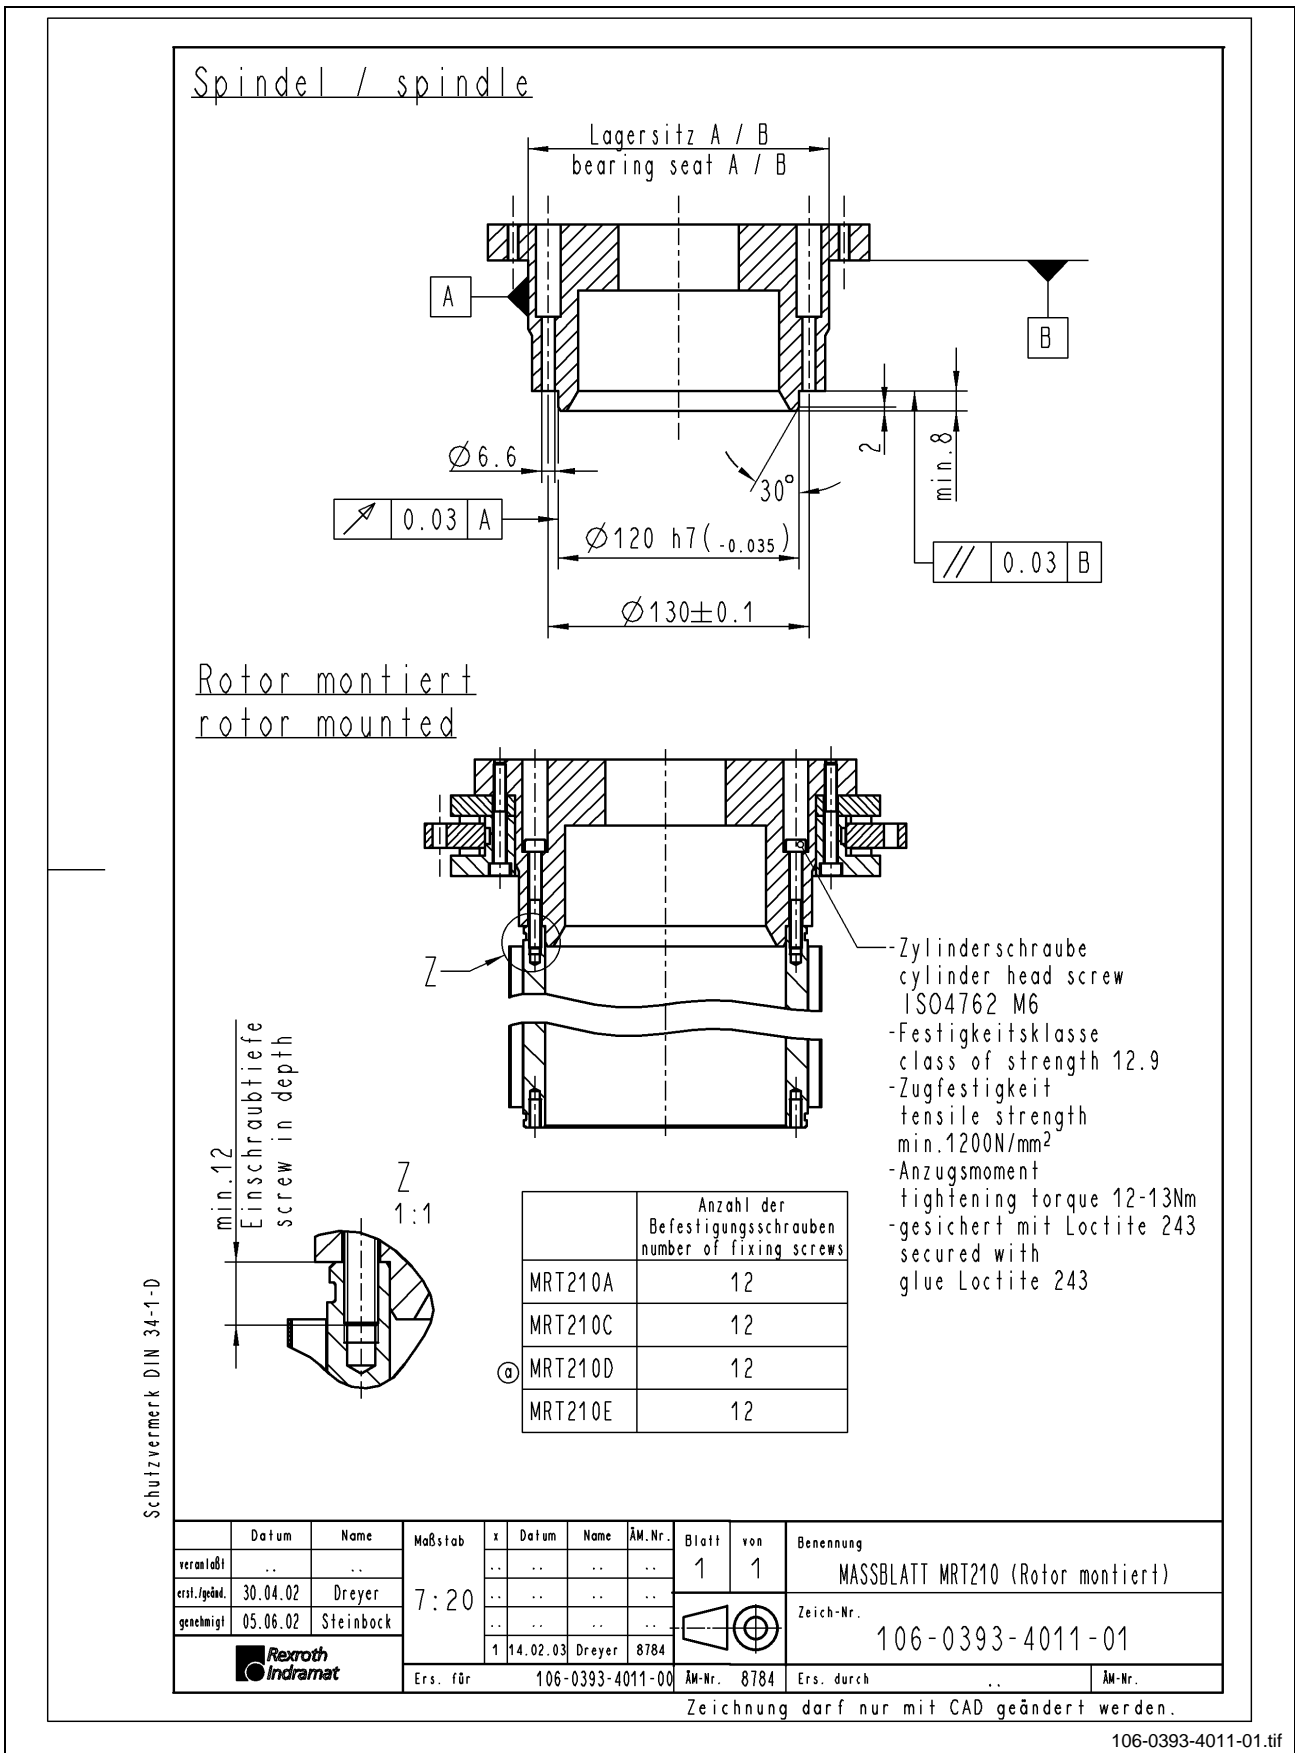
Dimension sheet Rotor MRT210, mounted
